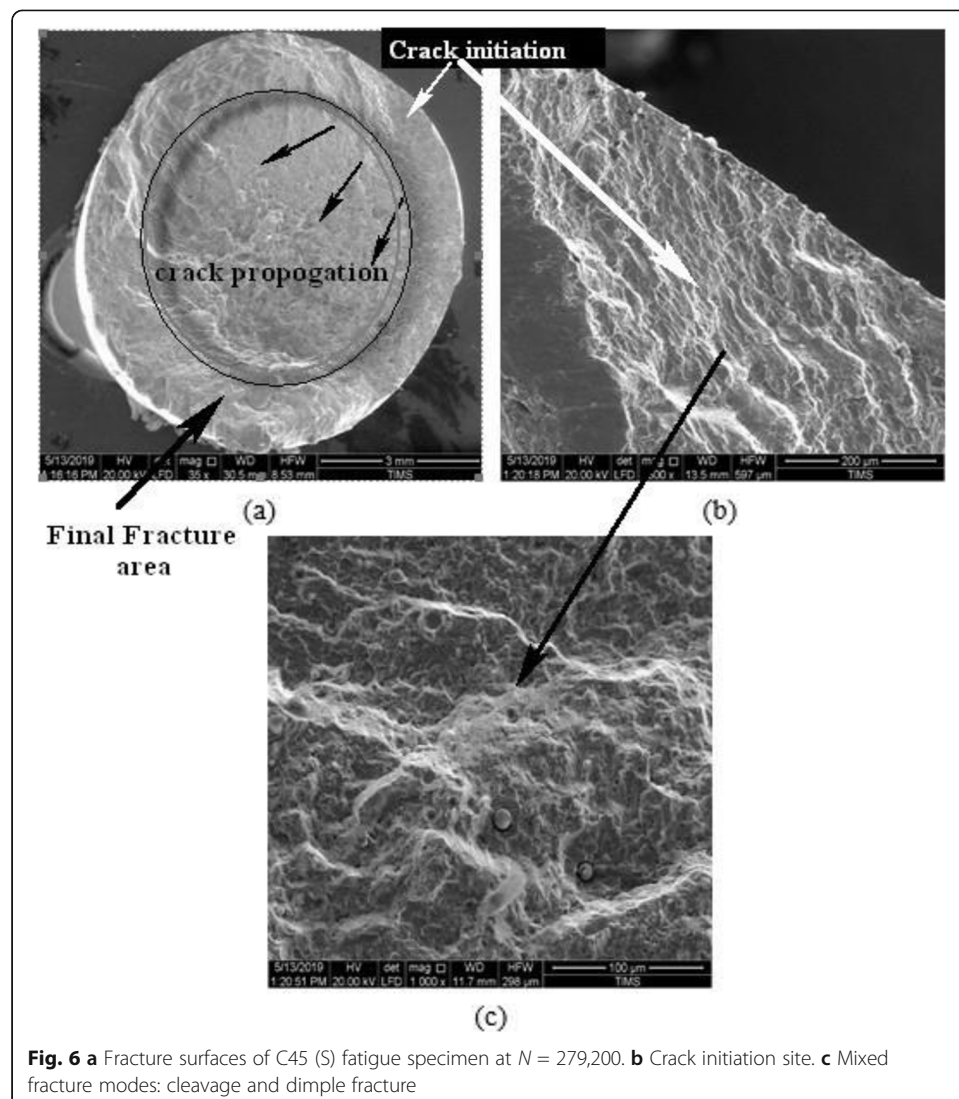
a Fracture surfaces of C45 (S) fatigue specimen at $N = 279,200$. b Crack initiation site. c Mixed fracture modes: cleavage and dimple fracture
